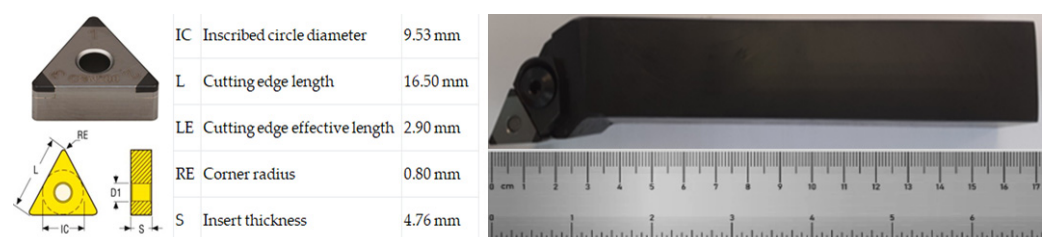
The SECO® TNGA332S-00820-L1-C CBN200 cutting insert mounted to a PTJNR 2525M16 cutting insert holder.
